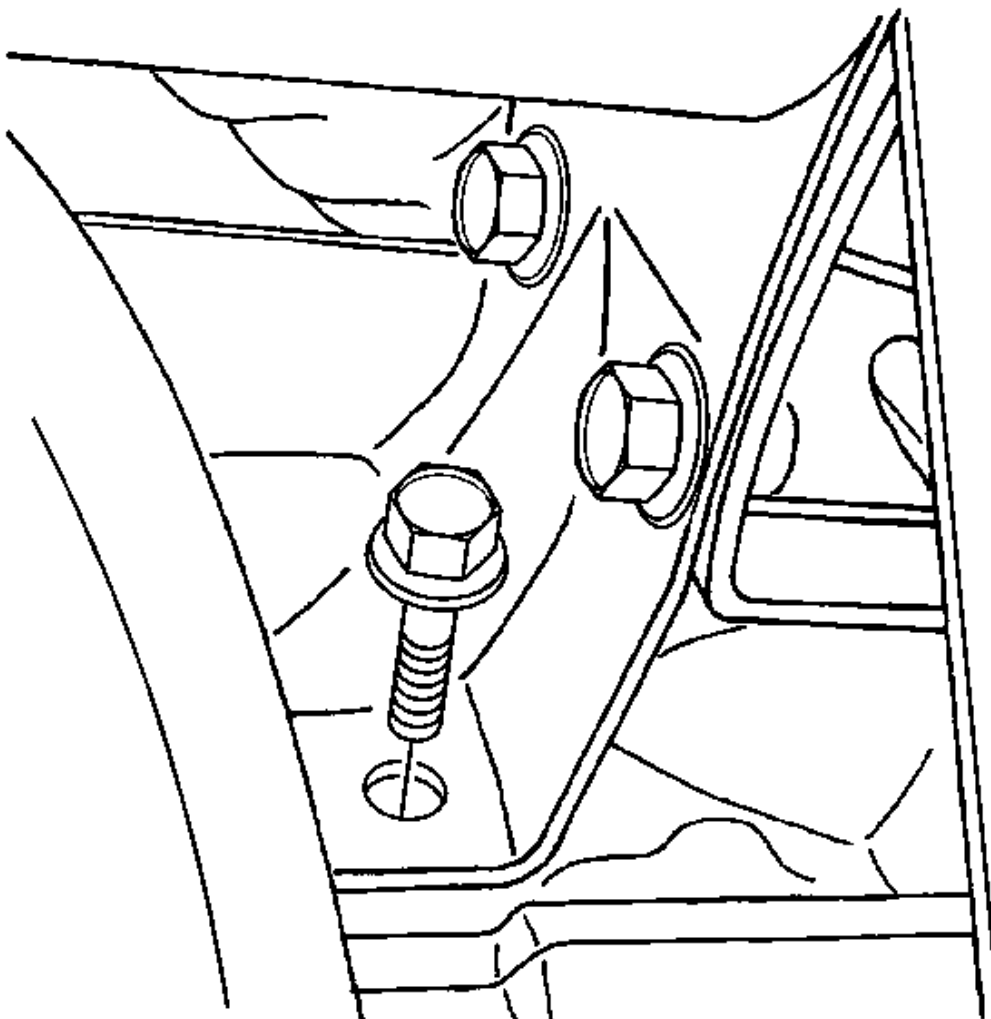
View Of Engine Mount Bracket-To-Engine Block Bolts
